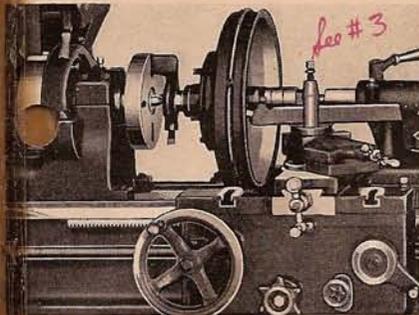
Truing a Worn Brake Drum of a Demountable type Front Wheel.
